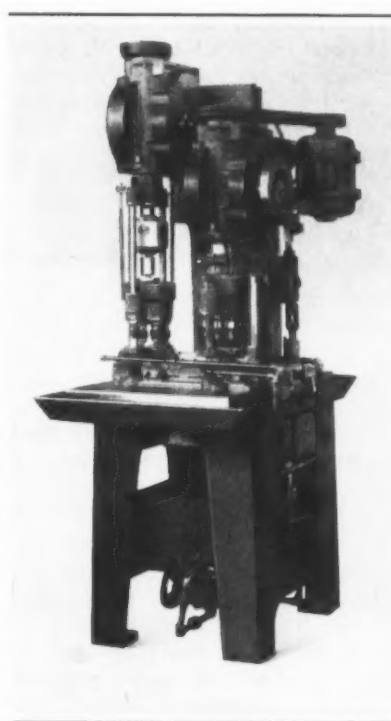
Langelier Magazine-fed Drilling and Tapping Machine
